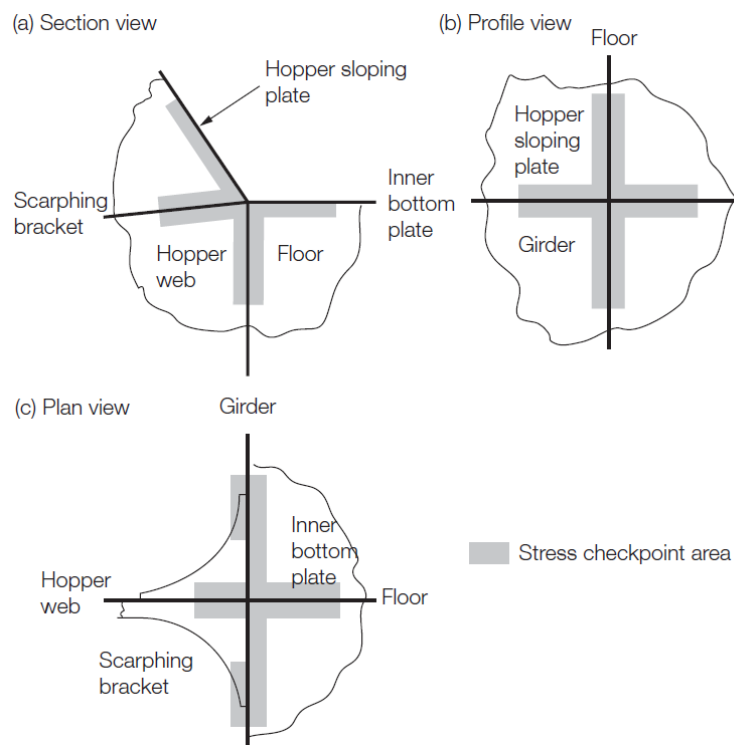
Welded hopper knuckle connection (ShipRight-3, 2004)
